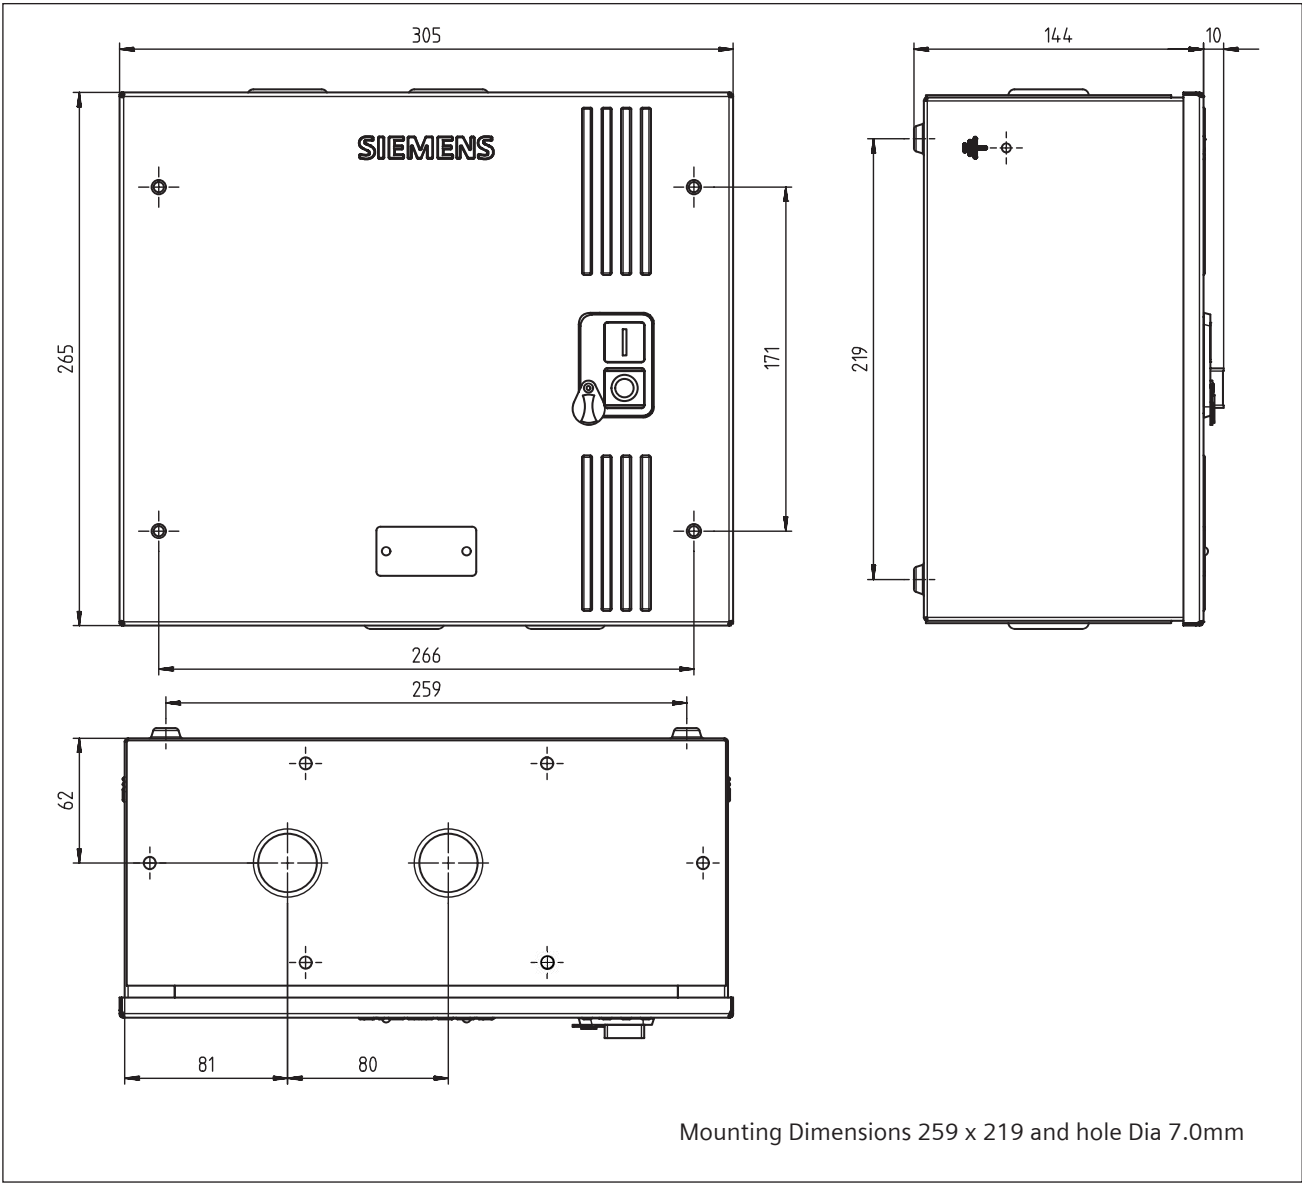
Dimensional Details for 3TE72 91-0A\*\
